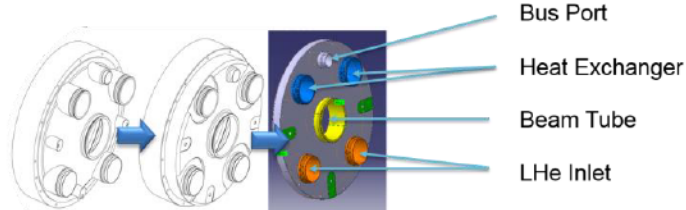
End Cover Design with openings per FRS requirement R-T-03 (CERN drawing LHCLMQXFA\_S0002).
